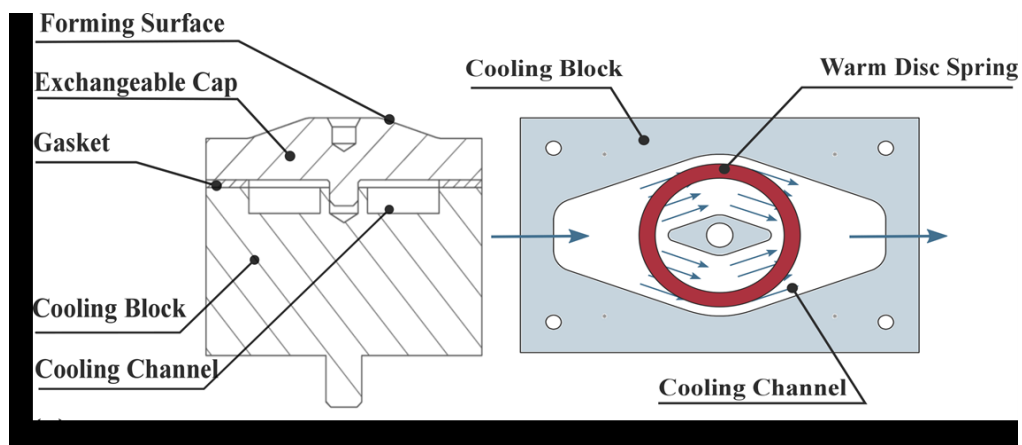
The design of form tools with water cooling channel (a) A section view of the forming tools (b) a top view of the cooling channel.
